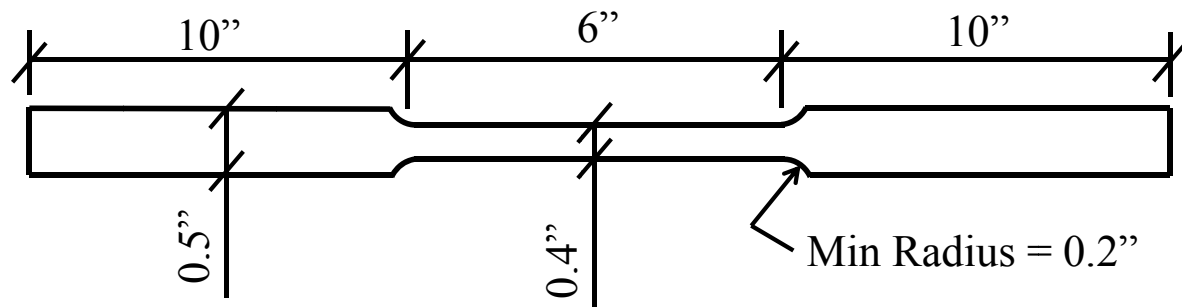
Final Specimen Geometry for Material 3-FY09 In-Plane Tension Specimens
